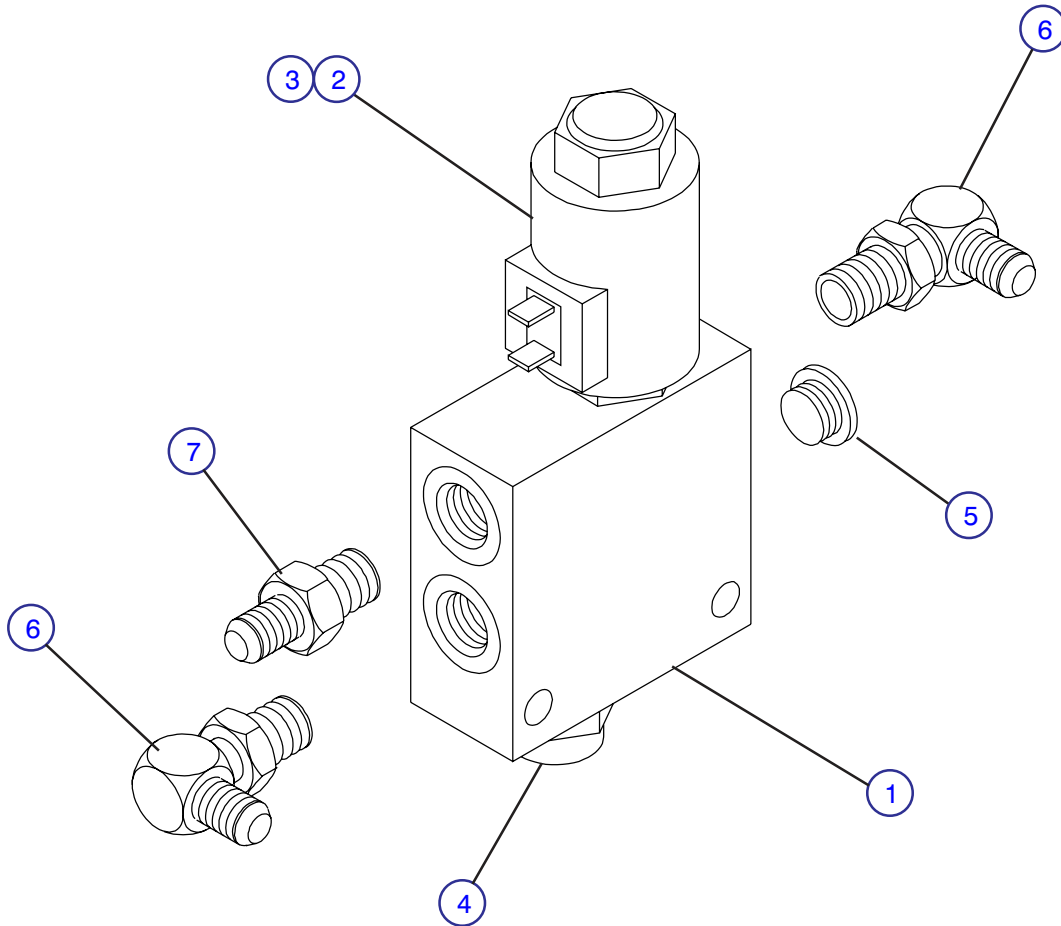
FRONT AXLE MANIFOLD ASSEMBLY
